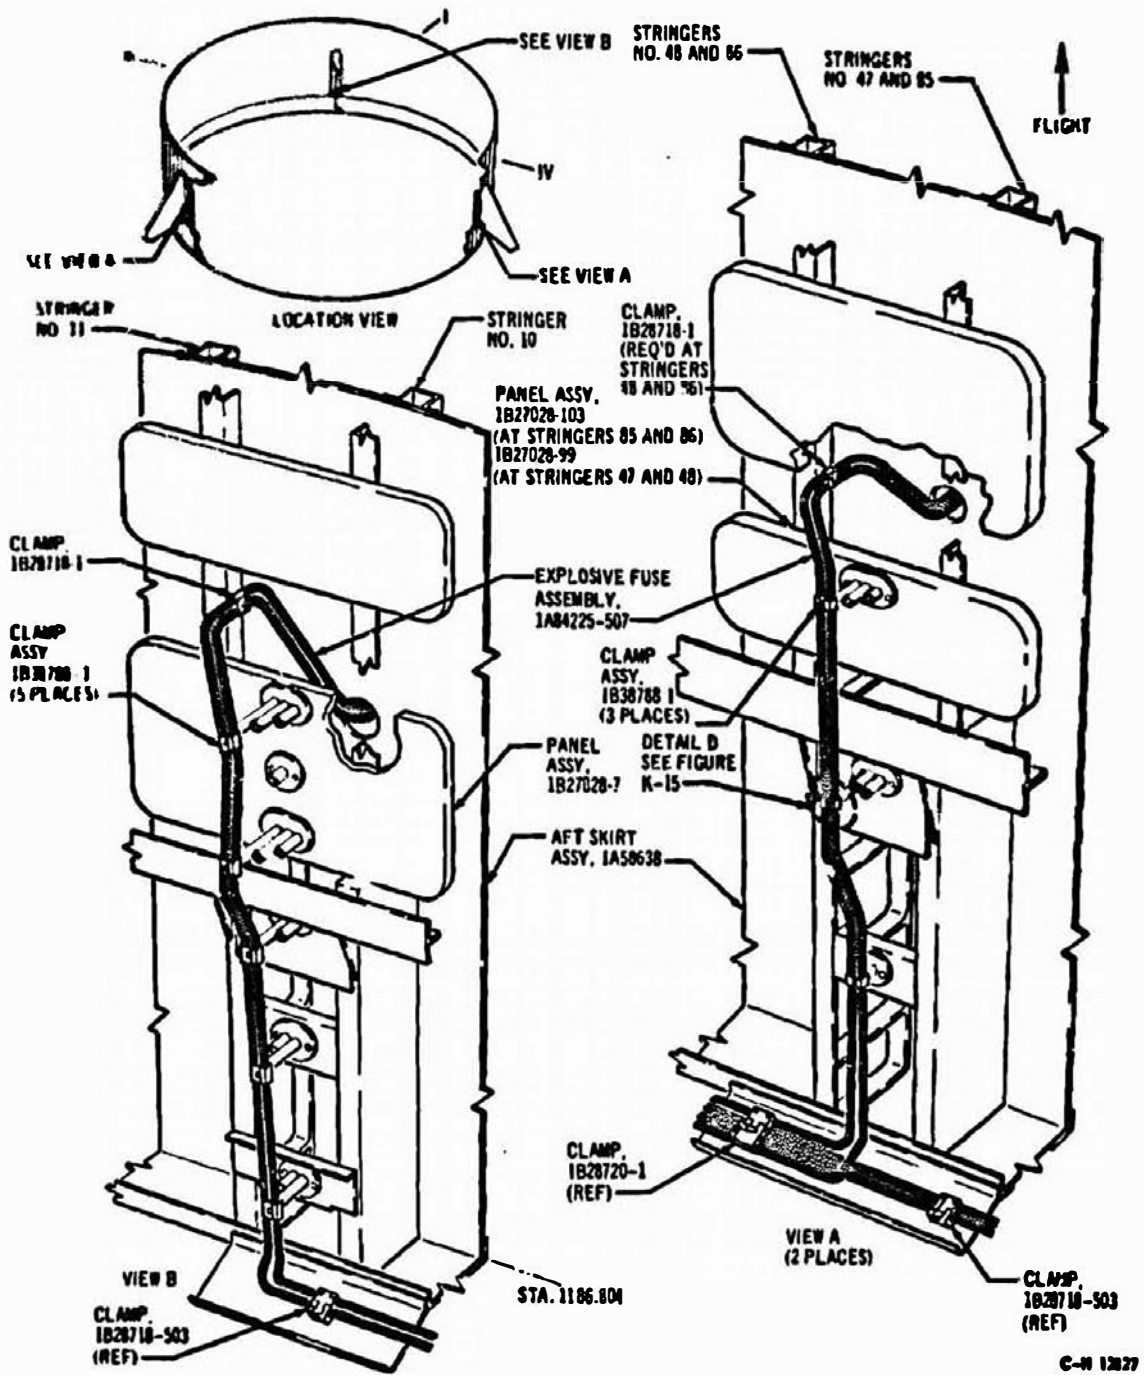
ULLAGE ROCKET JETTISON SYSTEM EXPLOSIVE FUSE ASSEMBLY AND FRANGIBLE NUT - INSTALLATION VIEW (Sheet 1 of 3)
